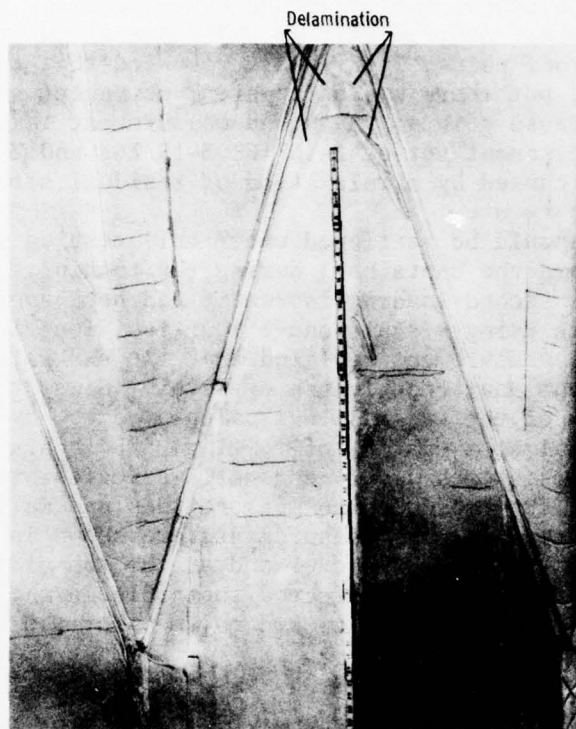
Skin wrinkling and delamination on the inside of the left side wall at the second bay from the end wall.
